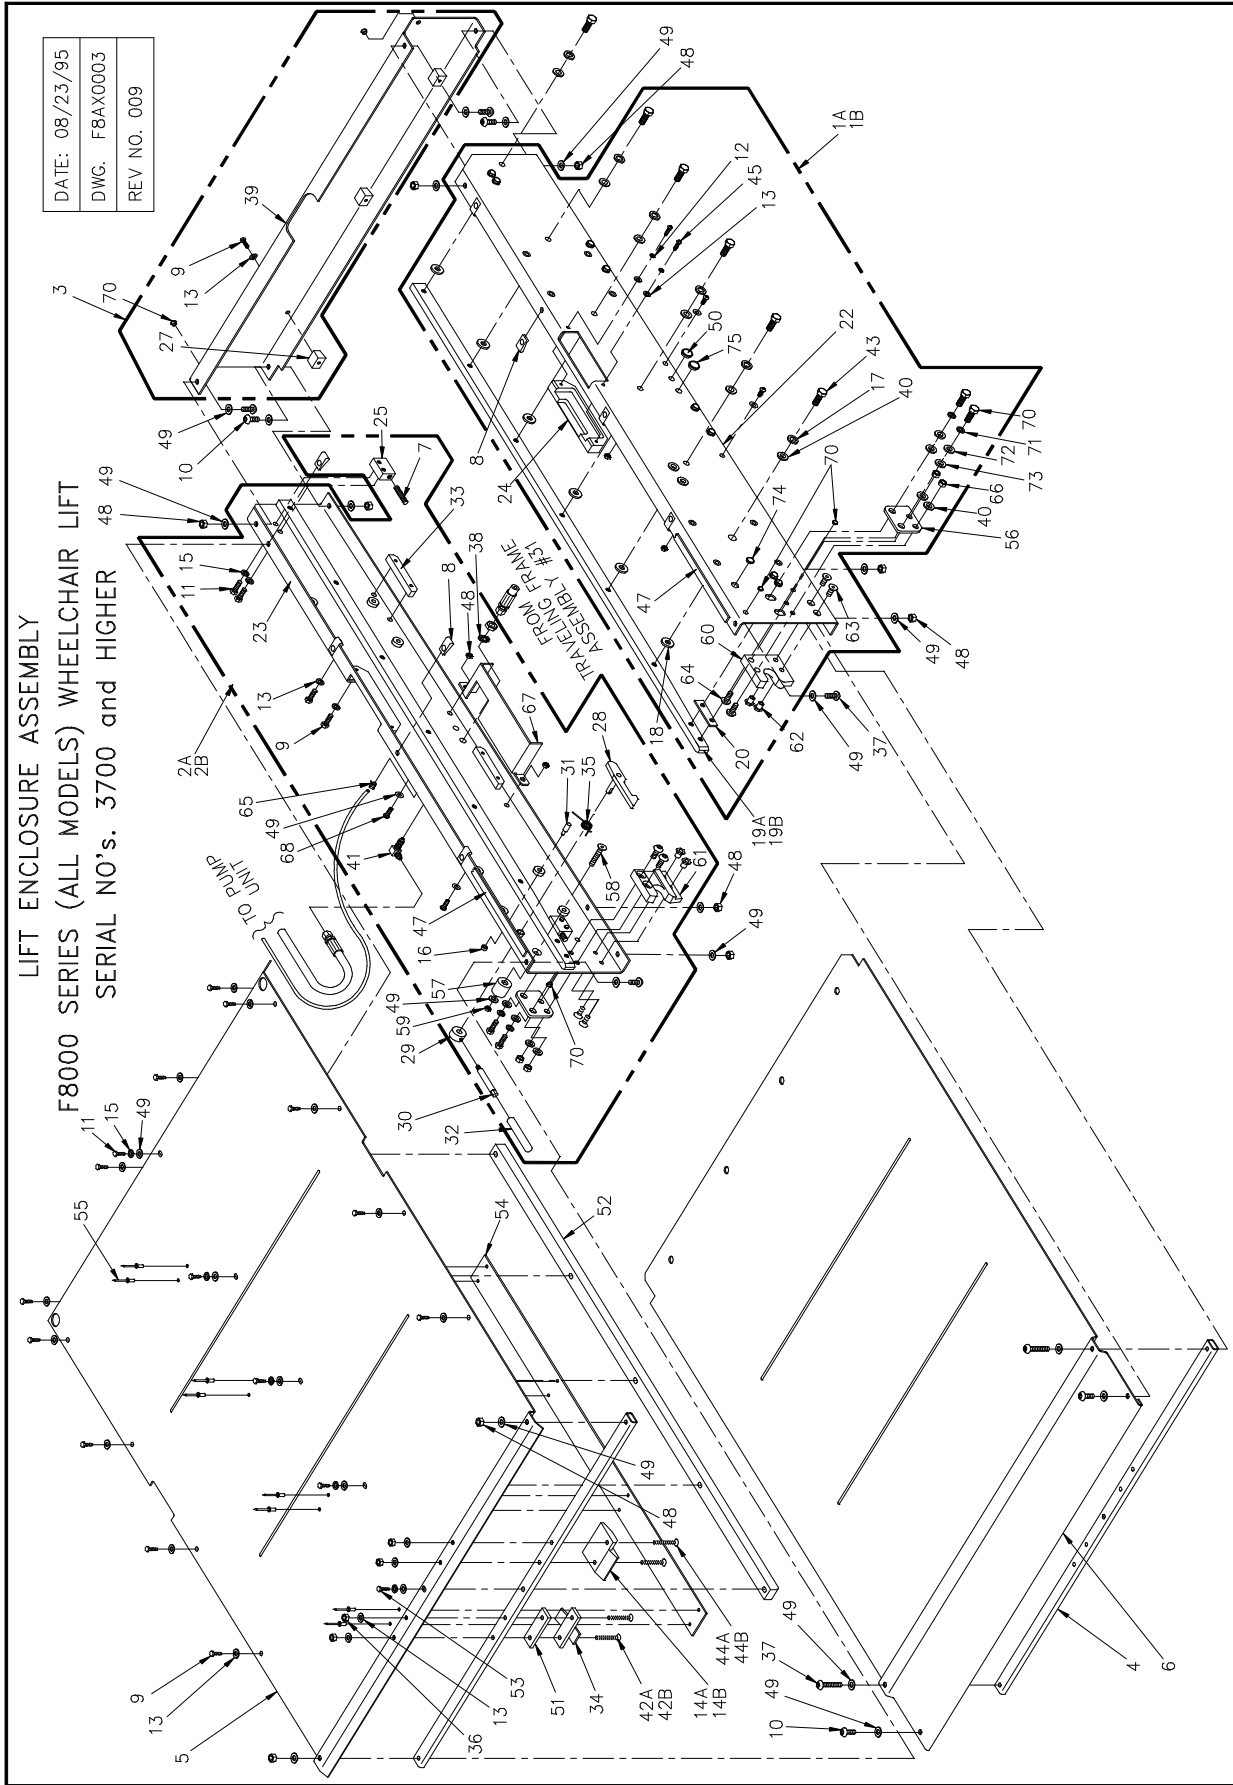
LIFT ENCLOSURE ASSEMBLY
